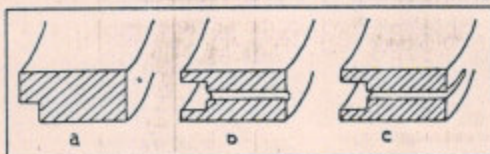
Oil control rings. a) Scraper (b) Drilled (c) Slotted
